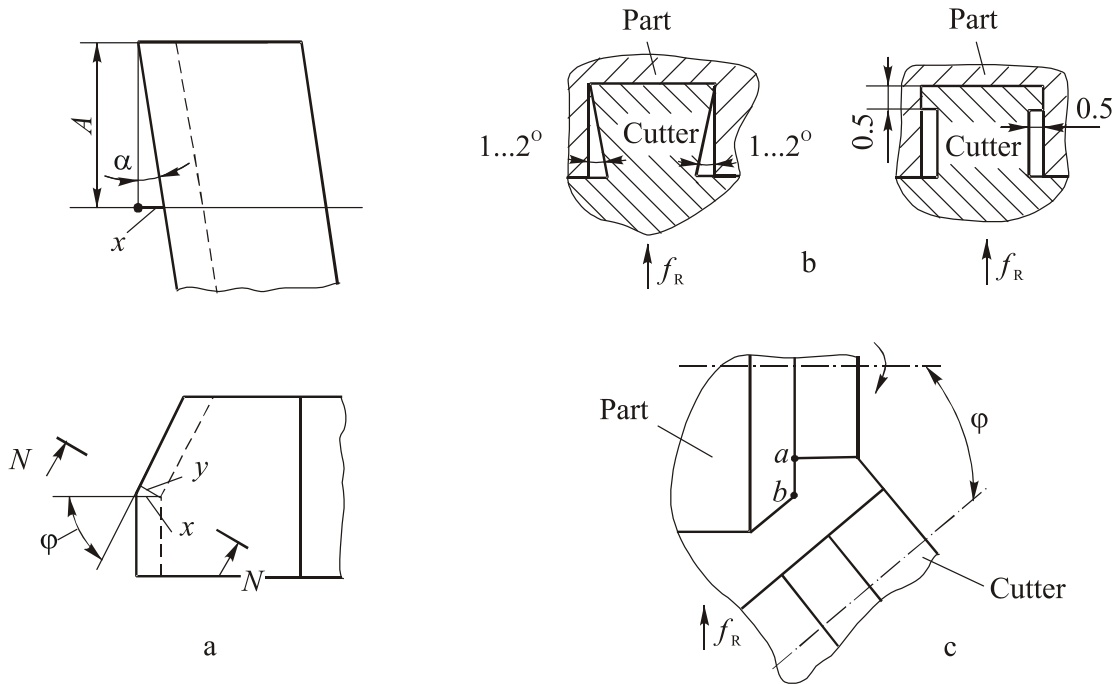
Clearances of the form cutters: (a) clearance angles on inclined cutting edges; (c) undercut on the cutting edges perpendicular to the workpiece axis; (c) cutter with inclined profile
